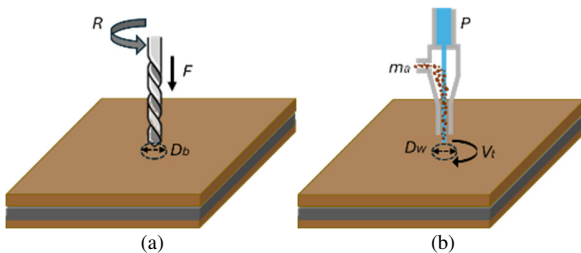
Characteristics of: (a) hole drilling and (b) hole cutting using AWJ.
